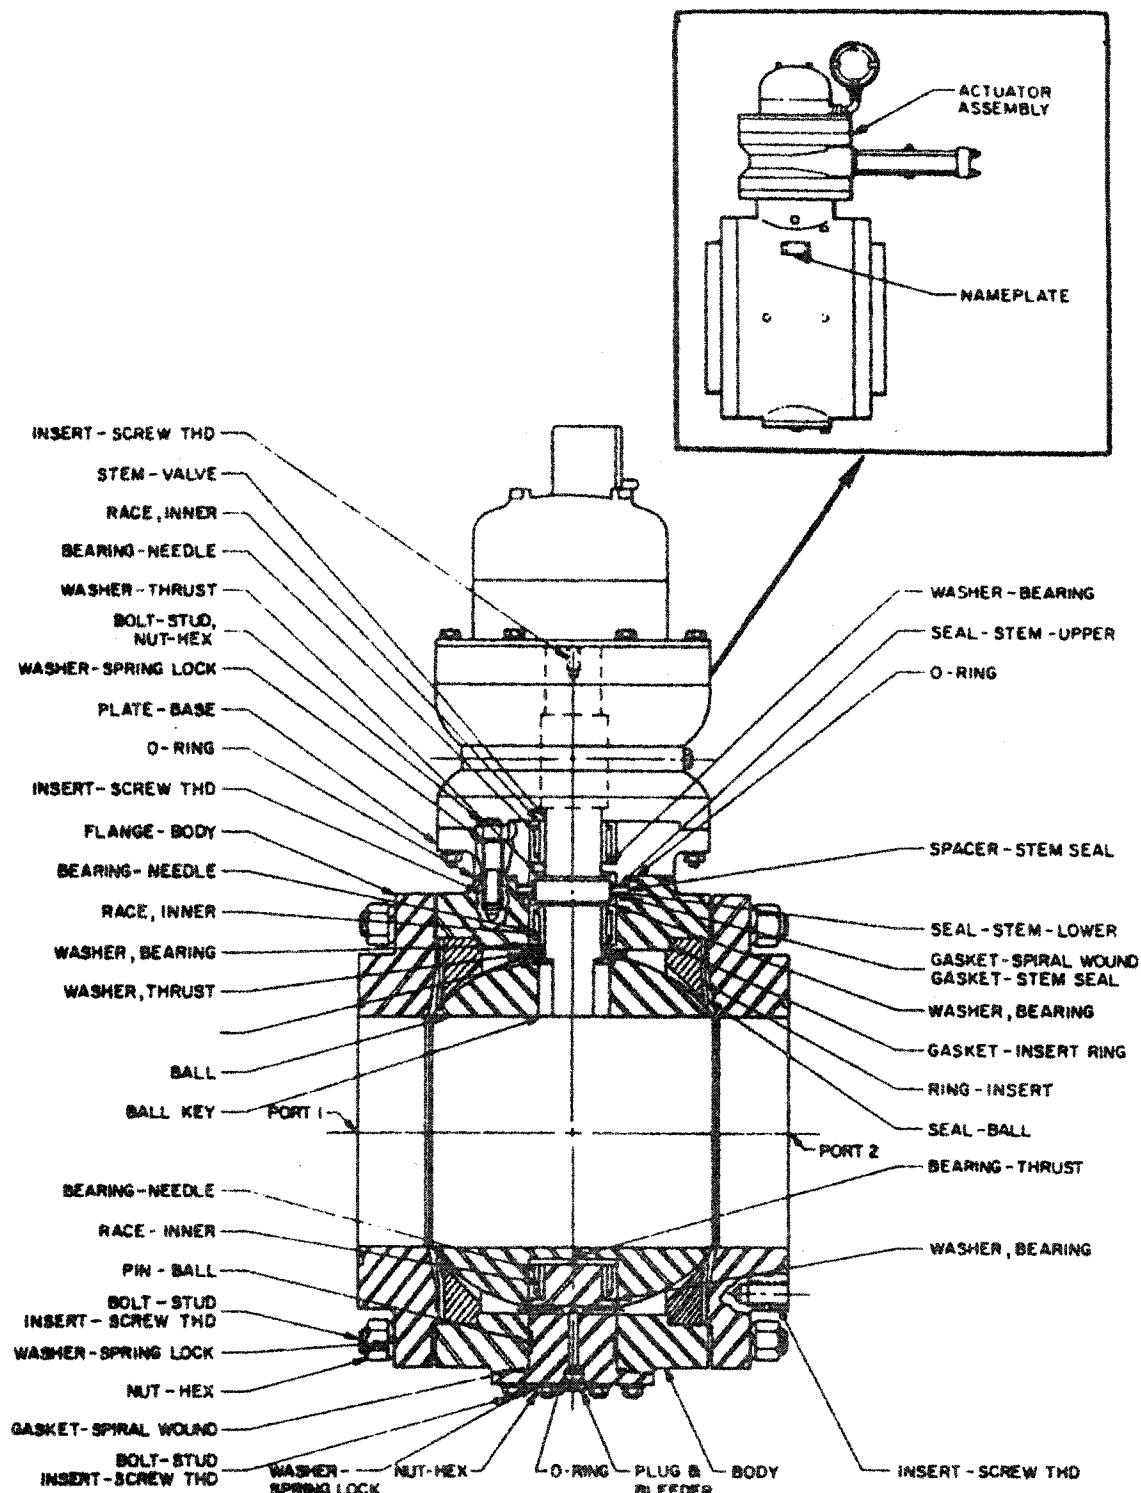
Ball Valve With Pneumatic Actuator (18")
